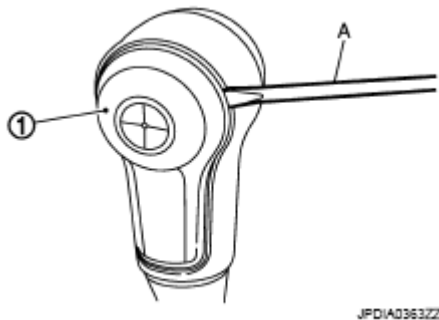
Identifying Knob Cover, Lock Pin And Selector Lever Knob
